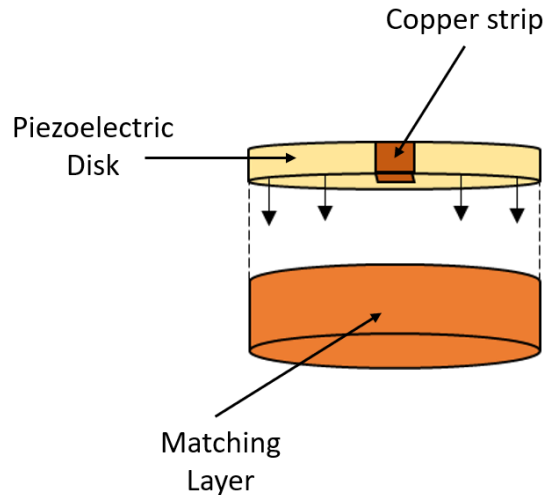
Sketch illustrating the attachment of a matching layer to a piezoelectric disk. The 2 mm tip of copper strip is placed between the two surfaces.
